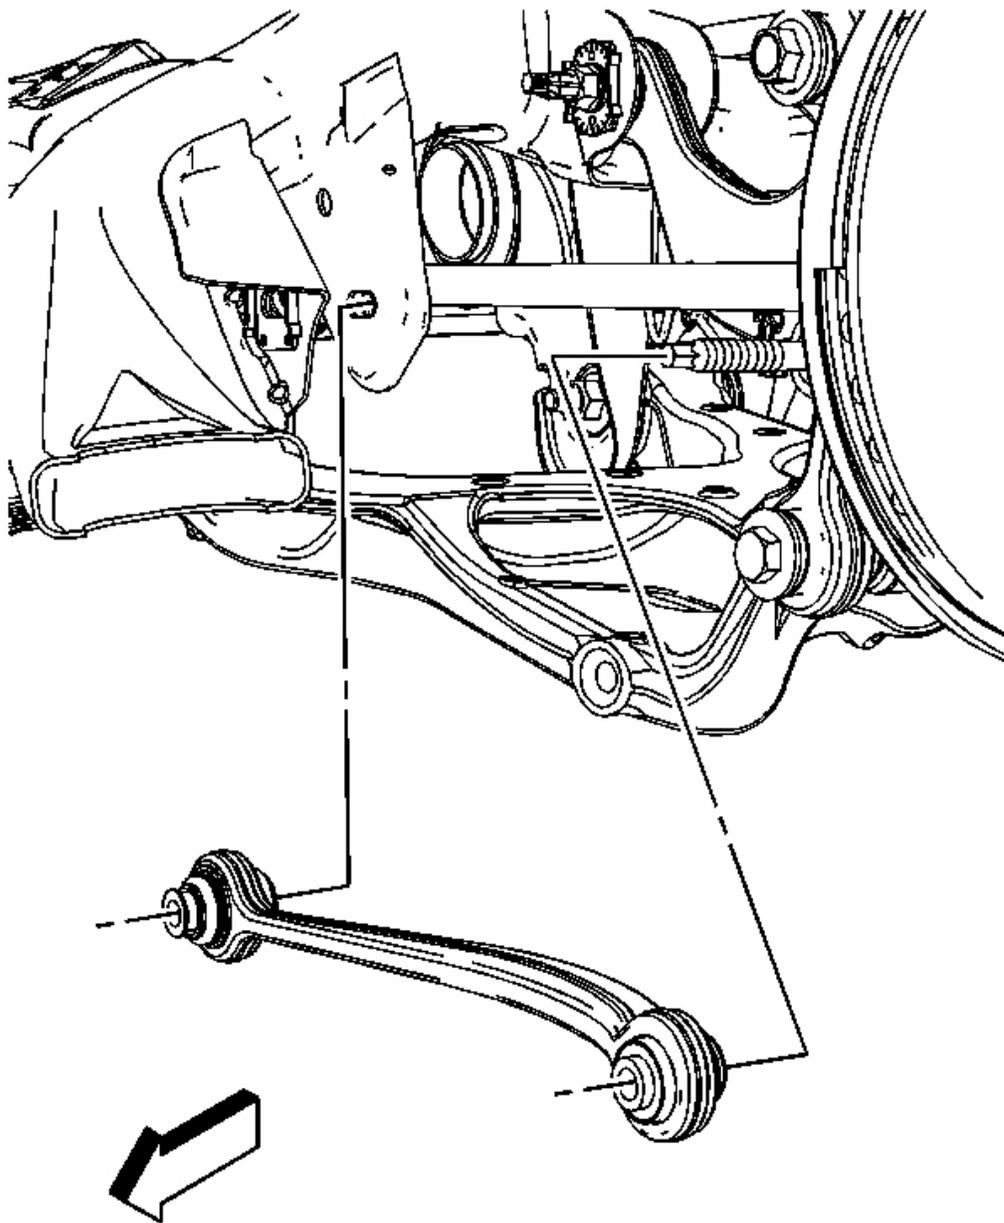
Identifying Adjuster Bolt In Mounting Bracket & Adjuster Link
